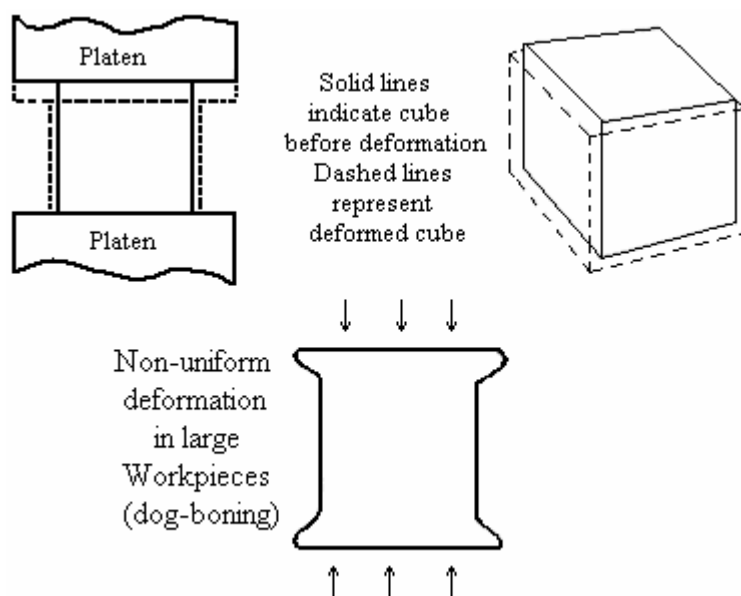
Sketches illustrating the deformation of a plastic workpiece
